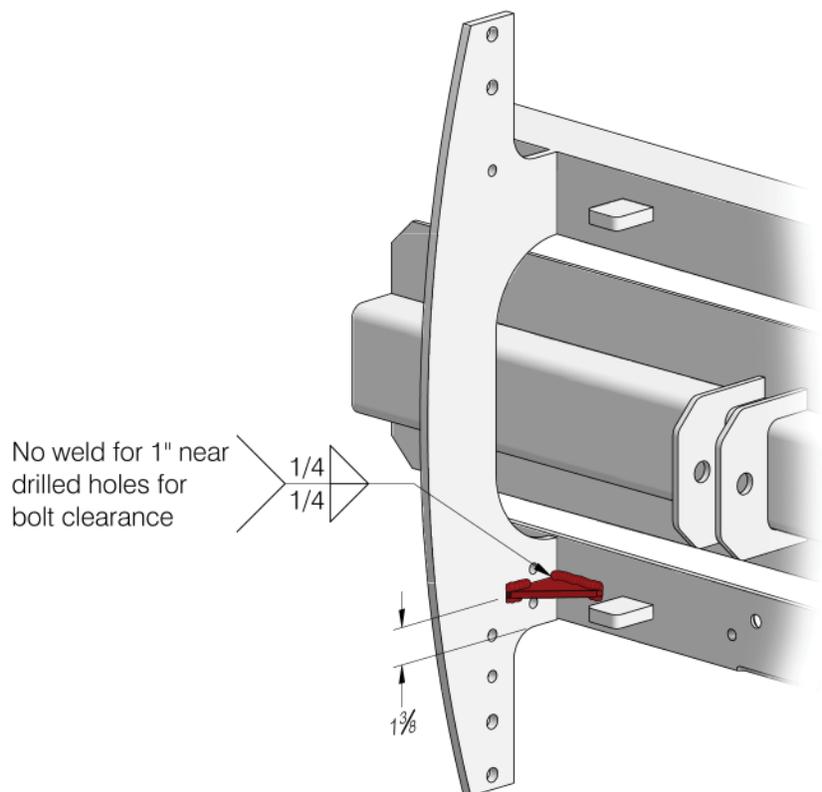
Weld support gusset to baler frame
